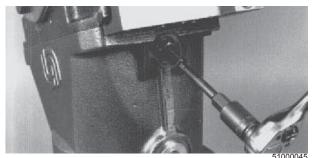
Rotate Minimum Displacement Adjusting Screw
